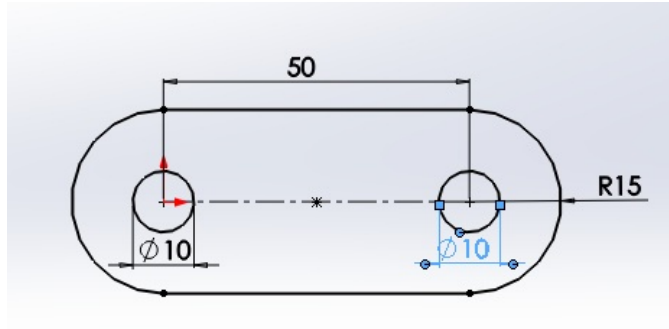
Final design dimension of the inserts to be used for primary structure connections
